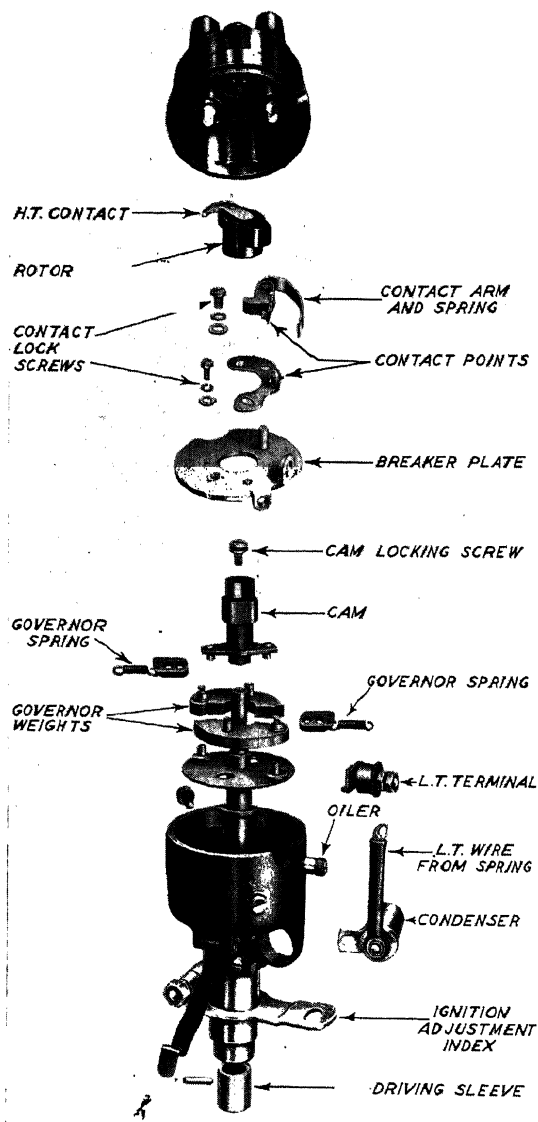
EXPLODED VIEW SHOWING PARTS OF AUTOMATIC-ADVANCE DISTRIBUTOR
